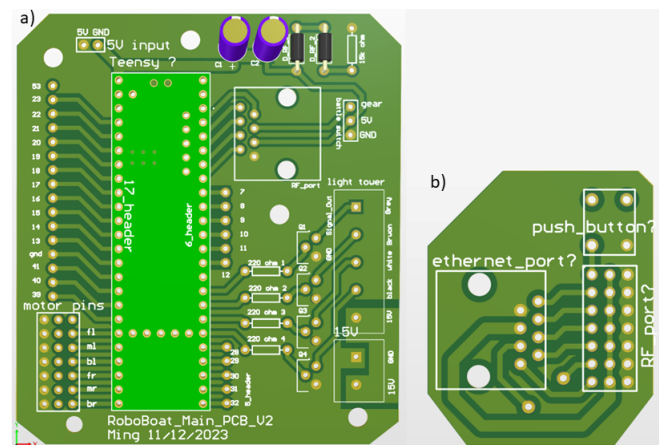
3D view of PCB BOards. a) main controller board. b) Auxiliary RF PCB board.
